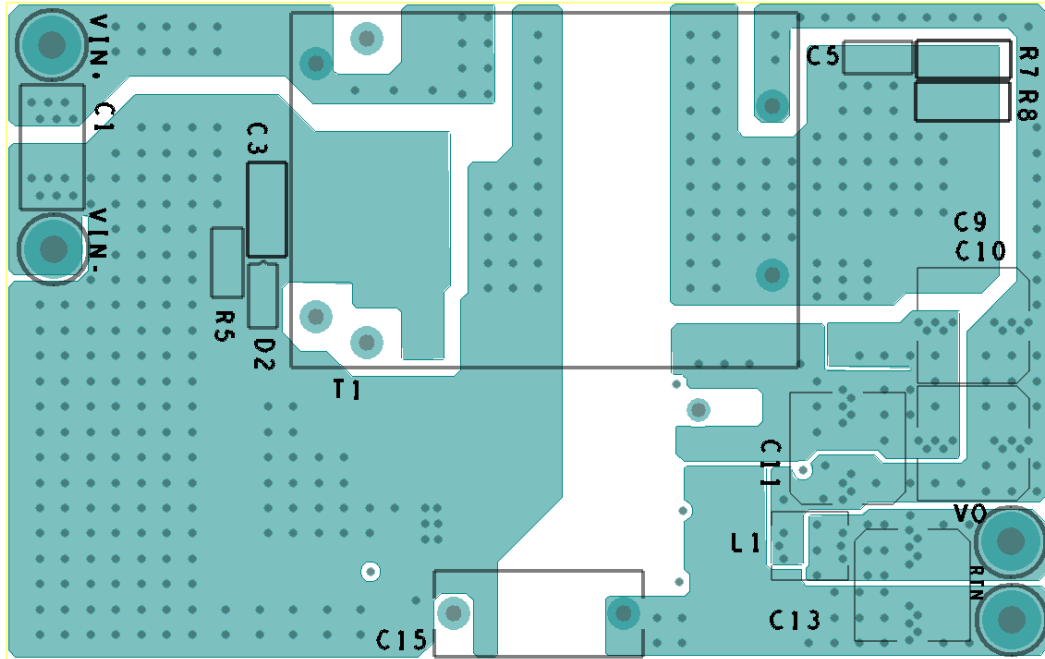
Printed Circuit Board Layout (Internal layer 1).
